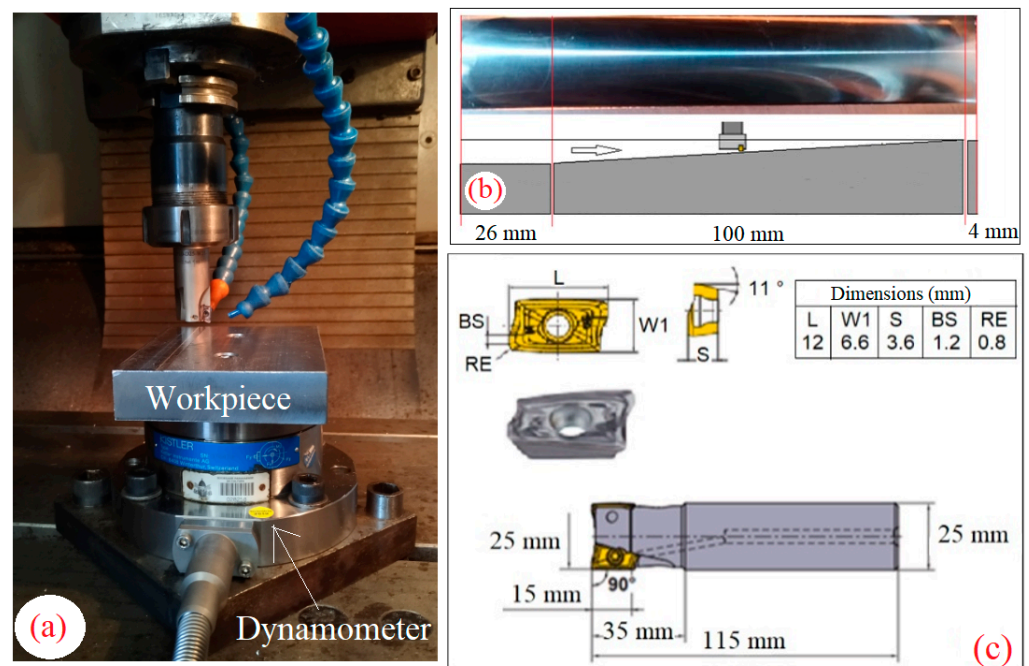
(a) Experimental setup showing the dynamometer workpiece, cutting tool, and fluid nozzles; (b) view of the ramp-milled surface; (c) dimensions of insert AOMT123608PEER-M and rod APX3000R253SA25SA for fixing the inserts.
